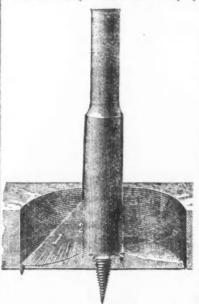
General View of the Tool in Boring Through a Board, the Spur Cutting through
